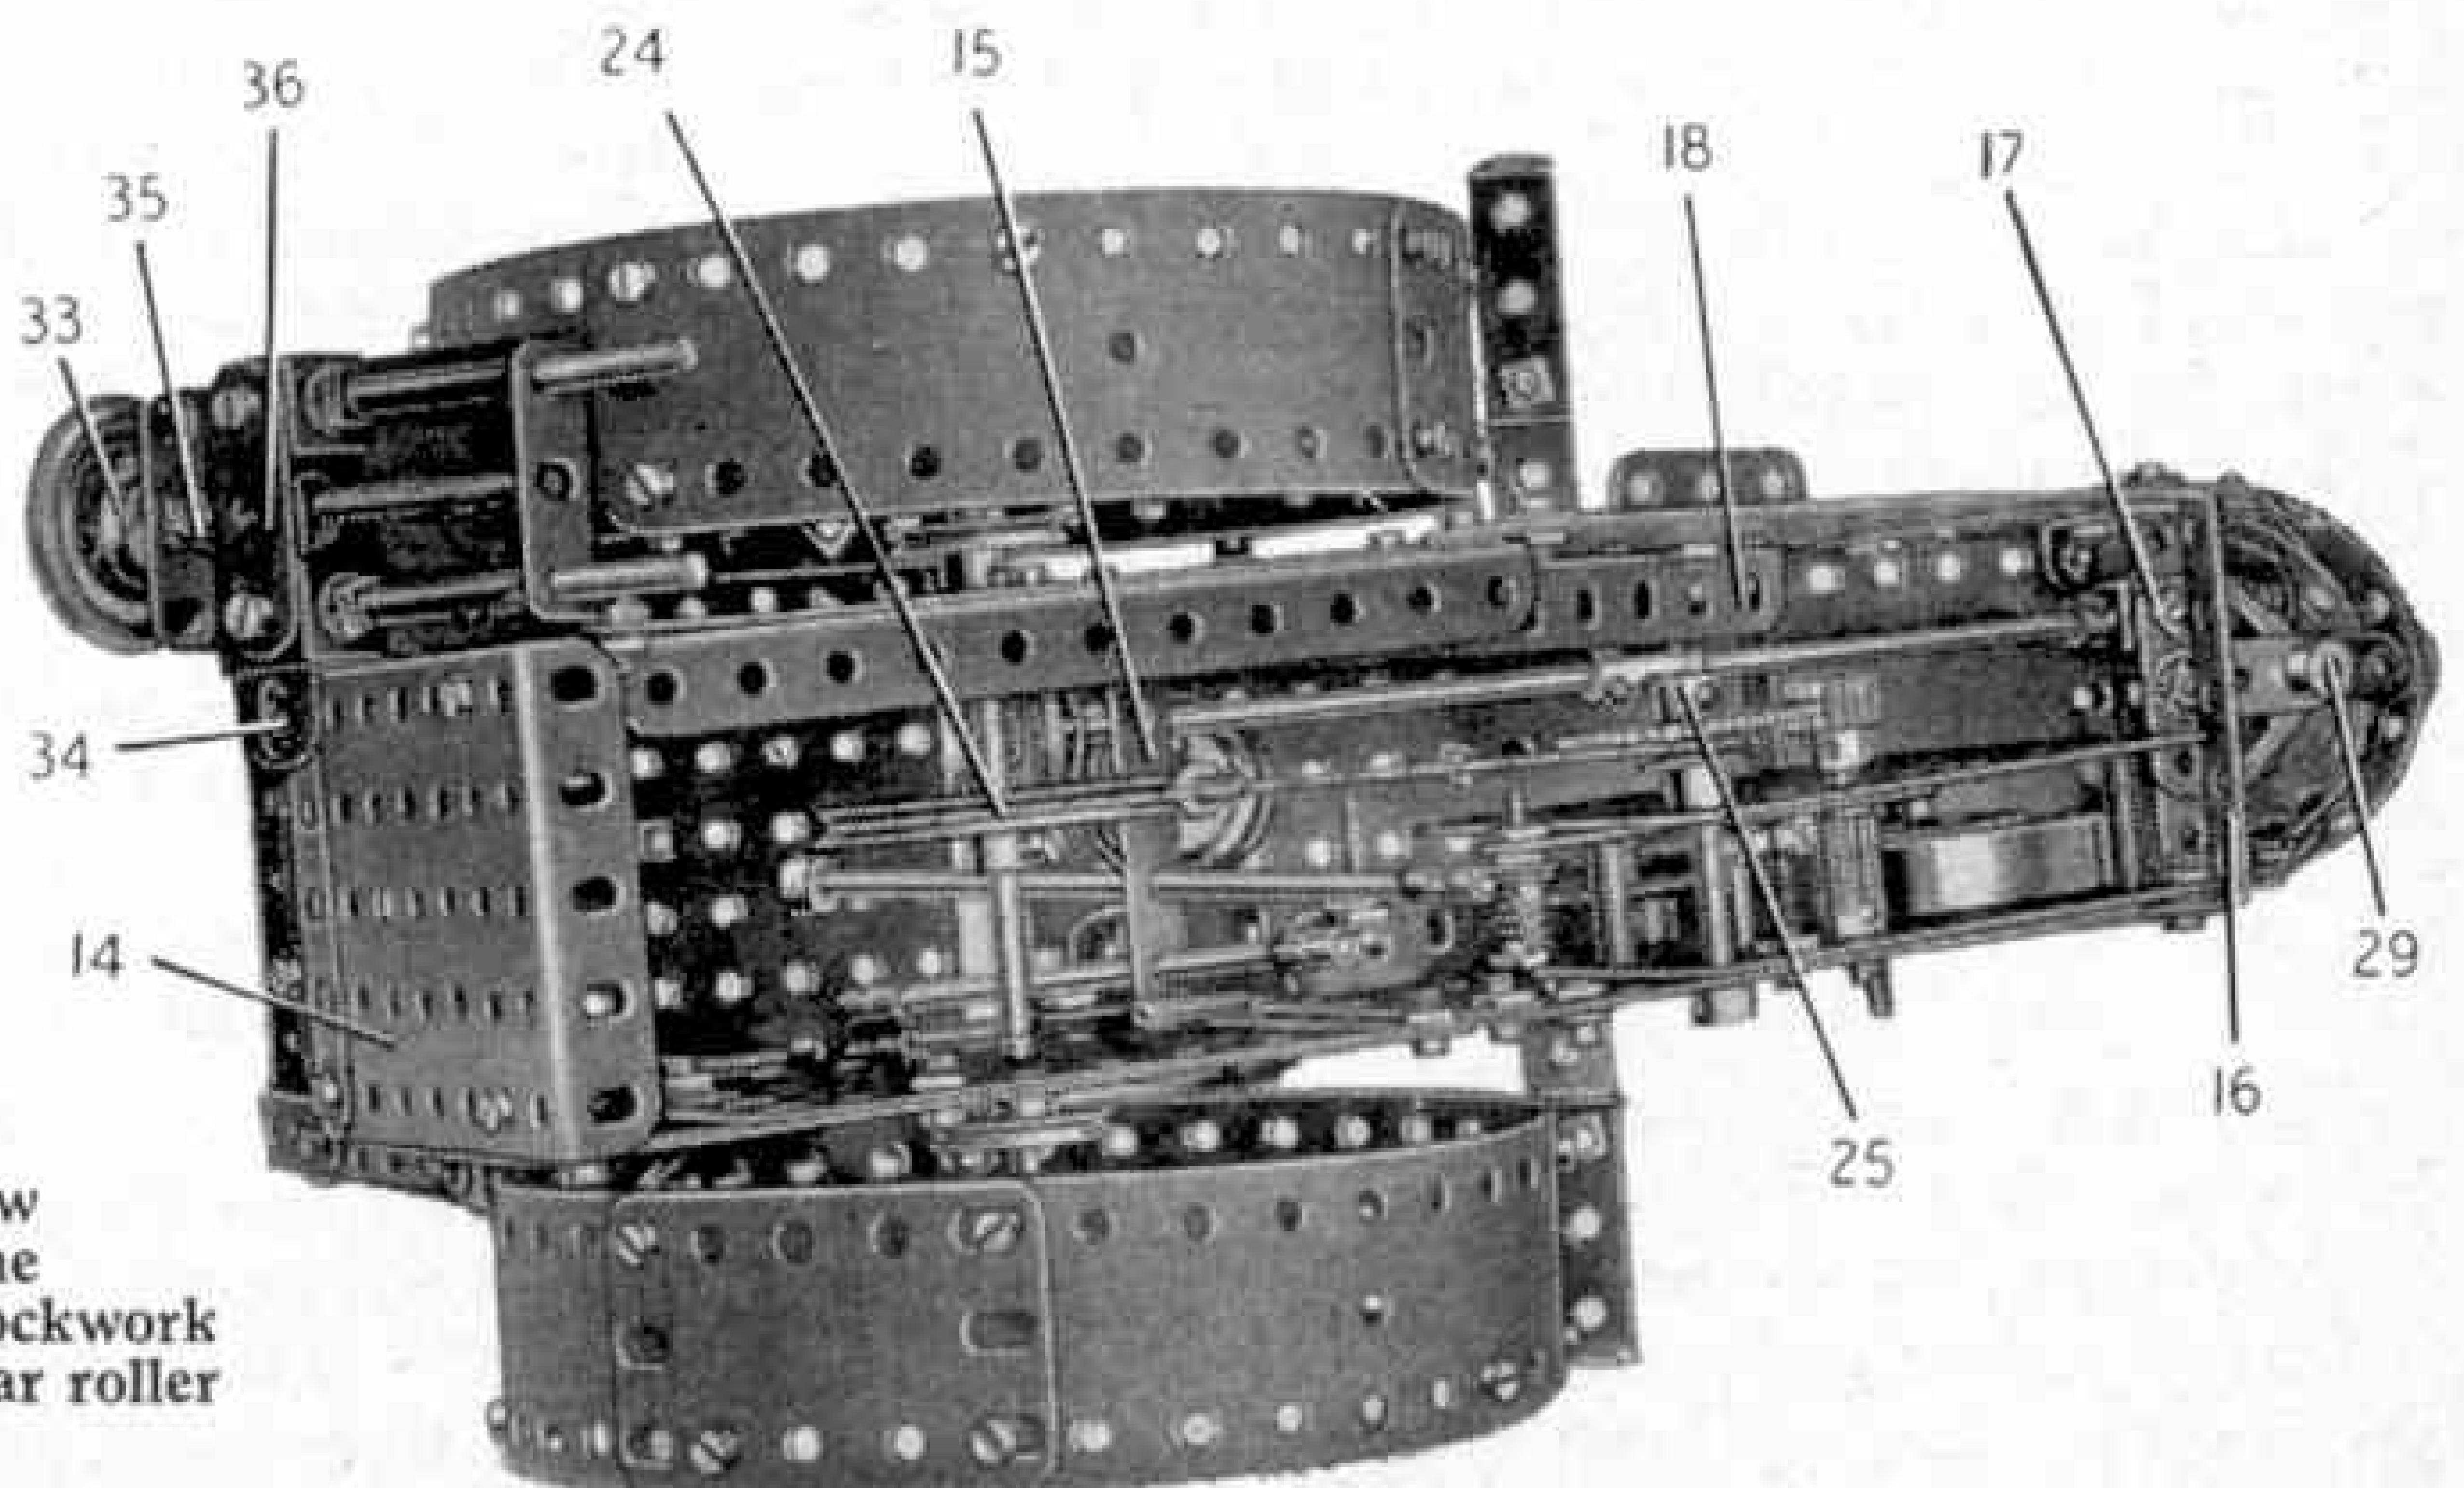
This underneath view of the Motor Roller shows the location of the No. 1 Clockwork Motor and the drive to the rear roller axle.
